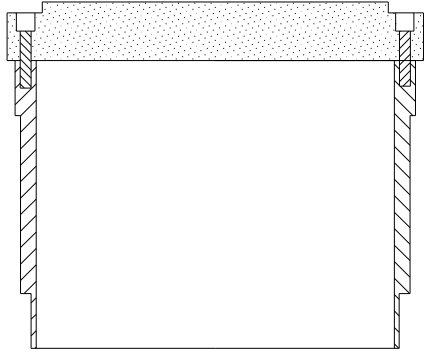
Drawing of apparatus flange (flame path) with the distance "shims" in correct position
